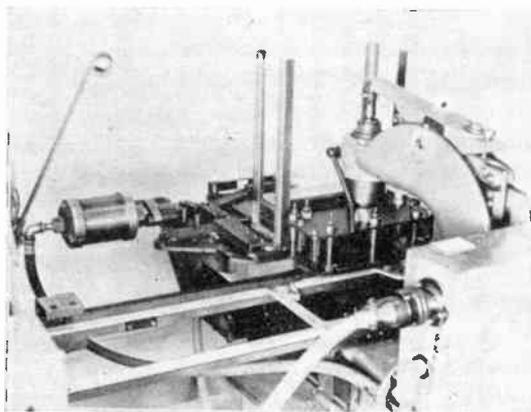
The Board Loading Machine for mounting the printed wiring boards on the Pallets prior to component assembly.
